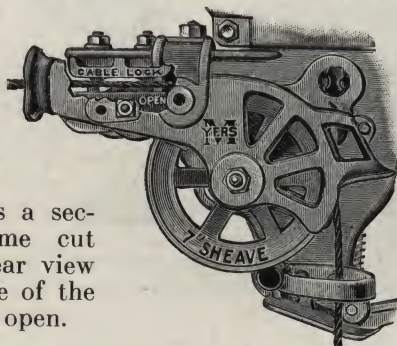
shows a section of the frame cut away to give a clear view of the free passage of the cable when lock is open.
